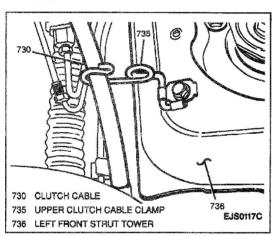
Clutch Cable at Upper Clutch Cable Clamp
